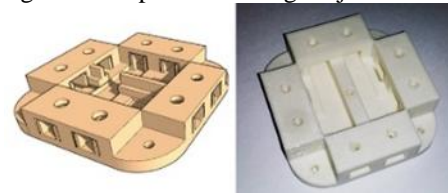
3D CAD model and the 3D printed first design of the modified junction
